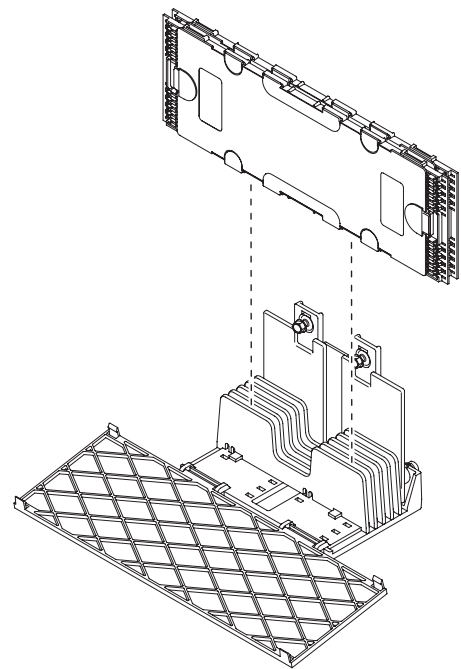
A—Fiber Trays Stored in Stacker Assembly.
